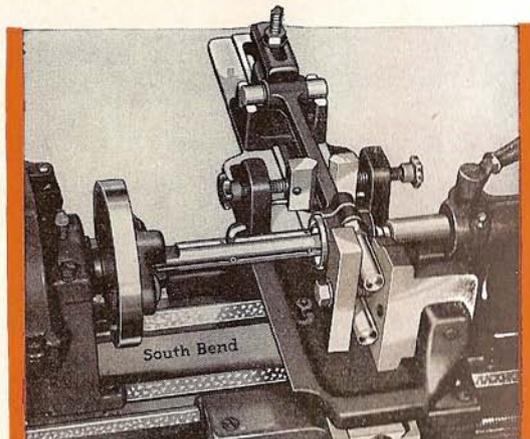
Close-up Boring a Connecting Rod in Lathe
